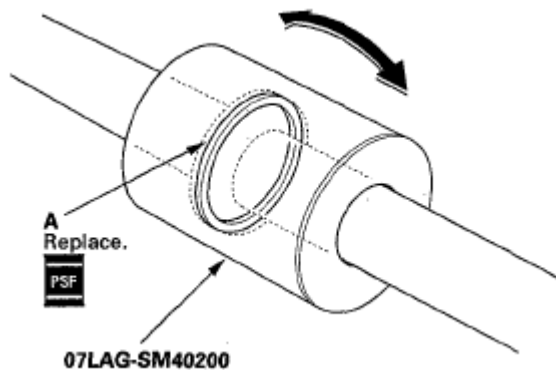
Identifying Sliding Tool Onto Rack And Over Piston Seal Ring
